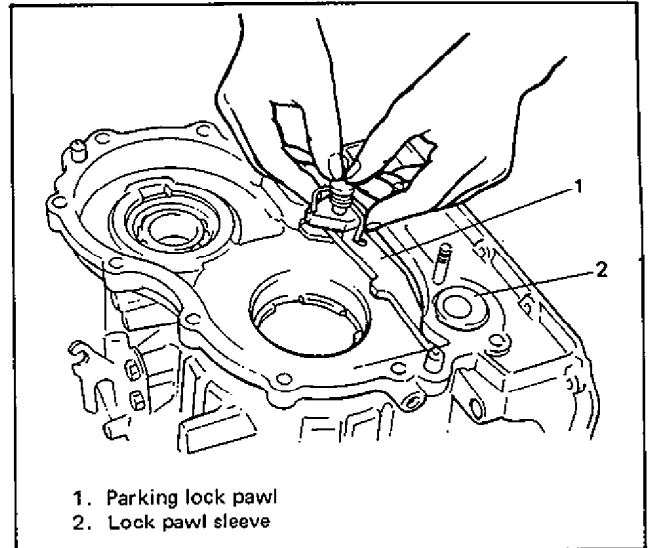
B-178 Installing Lock Pawl Shaft and Lock Pawl Spring
